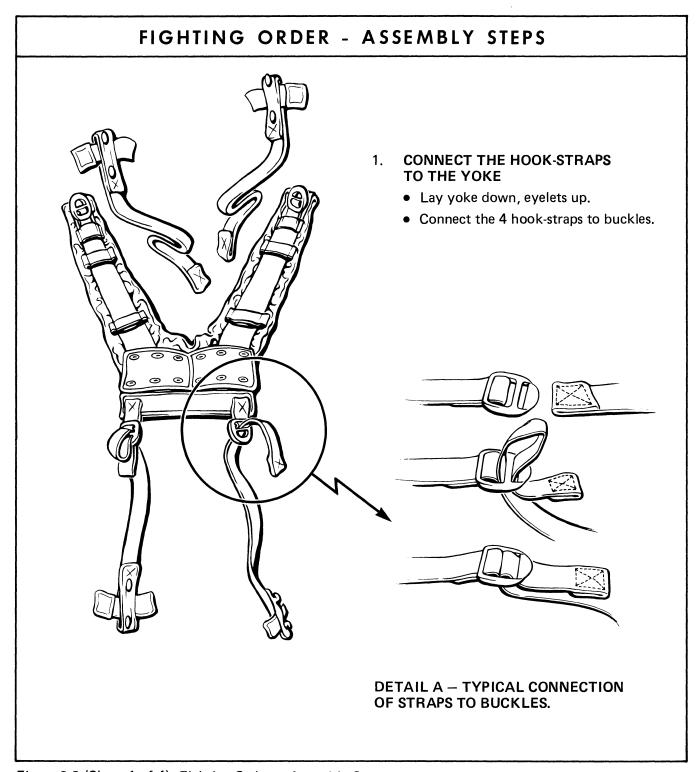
(Sheet 1 of 4) Fighting Order — Assembly Steps
